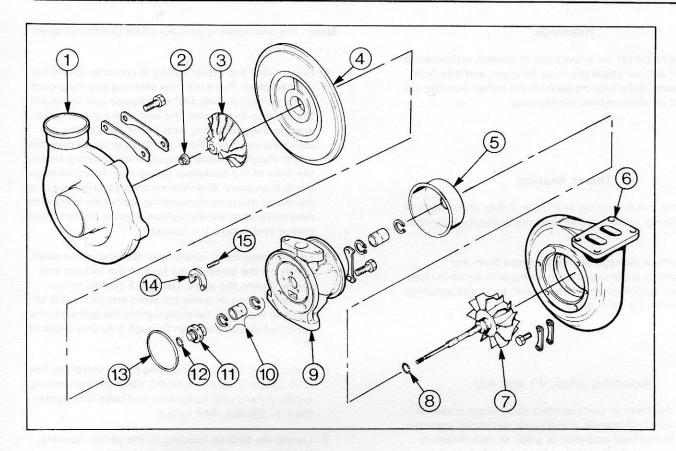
Exploded View of Garret AiResearch Turbocharger
